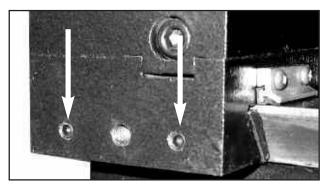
Gib Adjusting Screws - Tailstock (Shown with tailstock lock removed)
